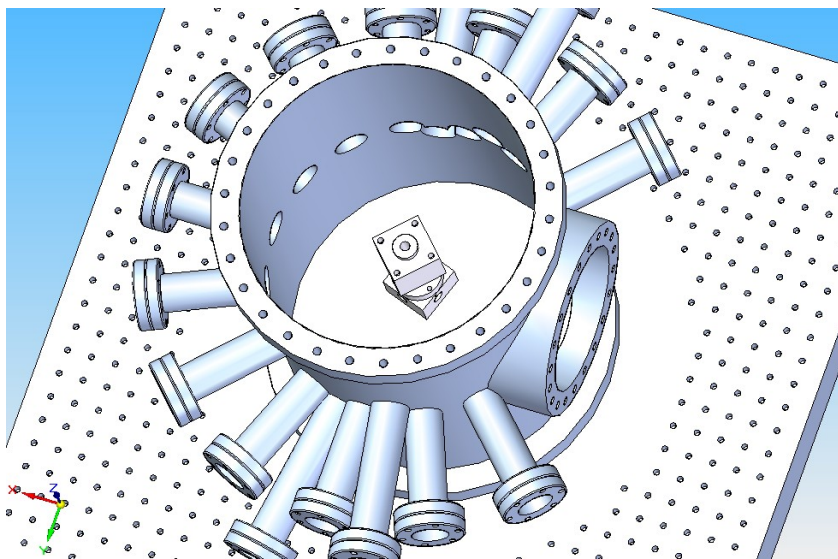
Top/isomorphic view of chamber with electrode assembly inside.
